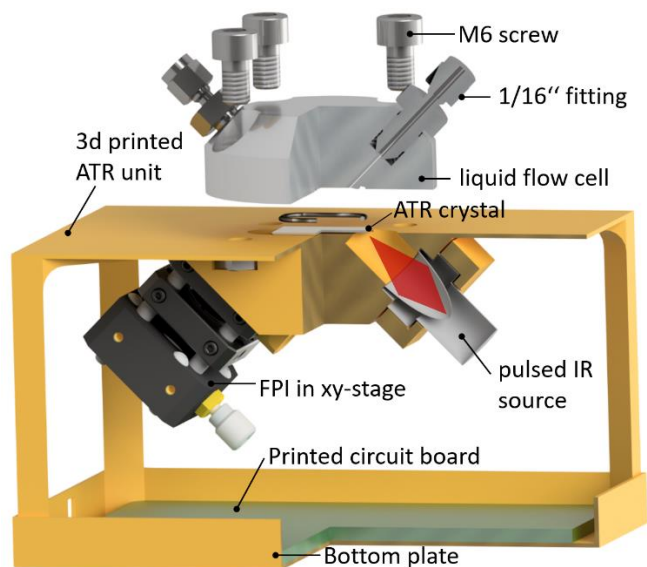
Exploded view of the 3D-printed mini-spectrometer with a footprint of 80 x 120 x 70 mm.
